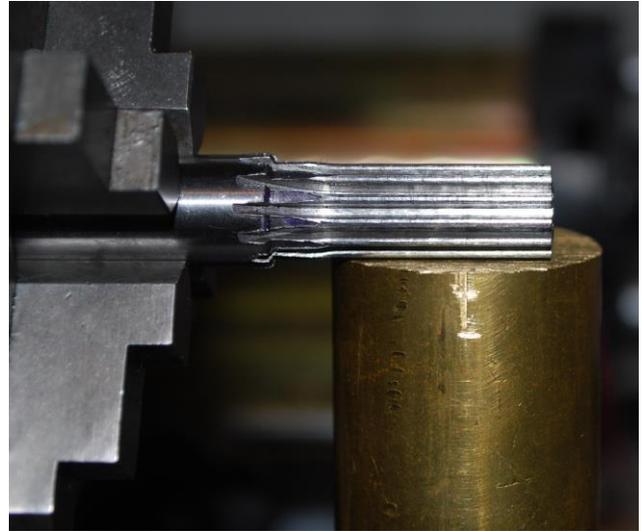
Supporting the pinion stock with a brass rod to prevent flexing and chatter. This photo is a recreation, taken after machining and several pinions had already been cut from the stock.
